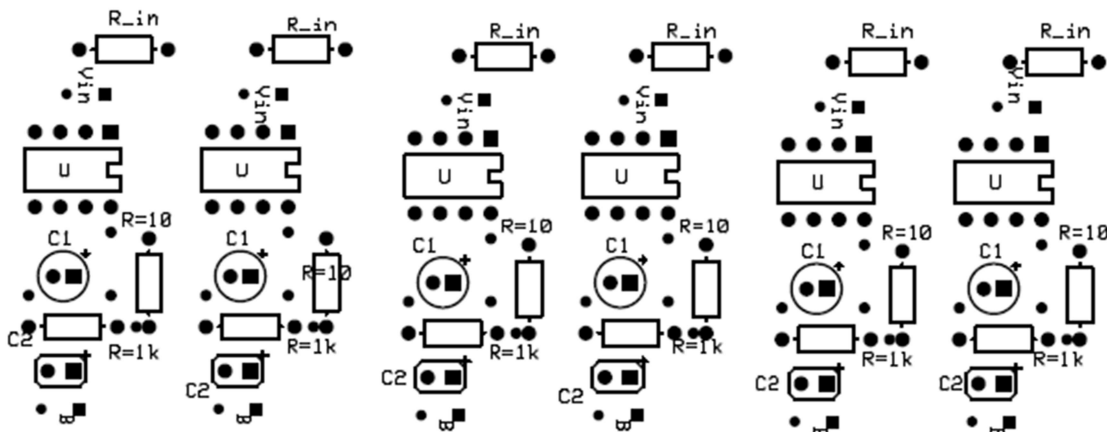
PCB layout (silkscreen, pads and text on top layer) of gate driver circuit
